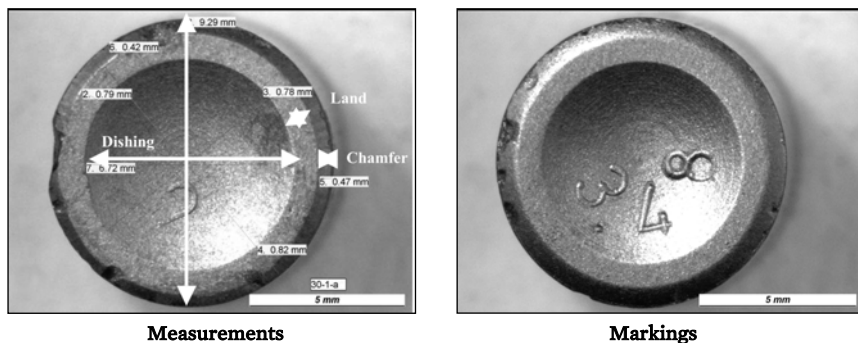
A uranium fuel pellet, showing dimensions and markings
